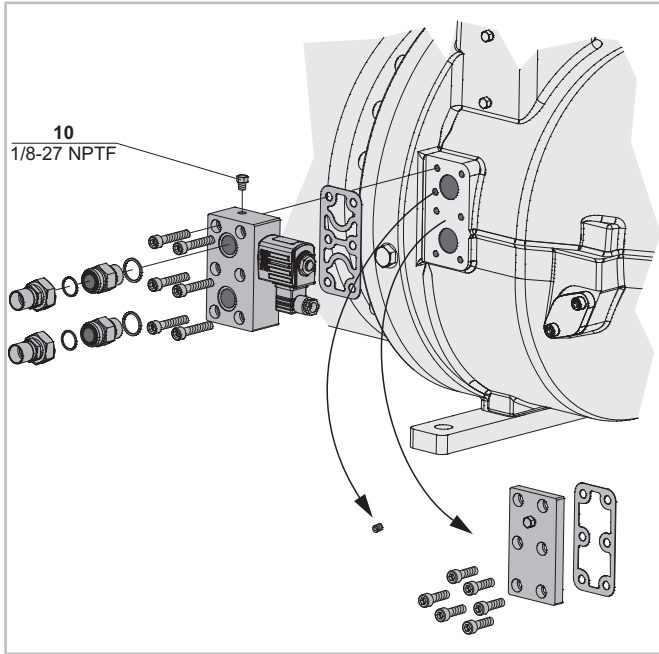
CSH(P)85 and CSH(P)95: Install oil cooler, illustration with control valve
